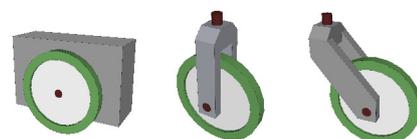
Common robot wheels - fixed, centred and castor type of wheel
